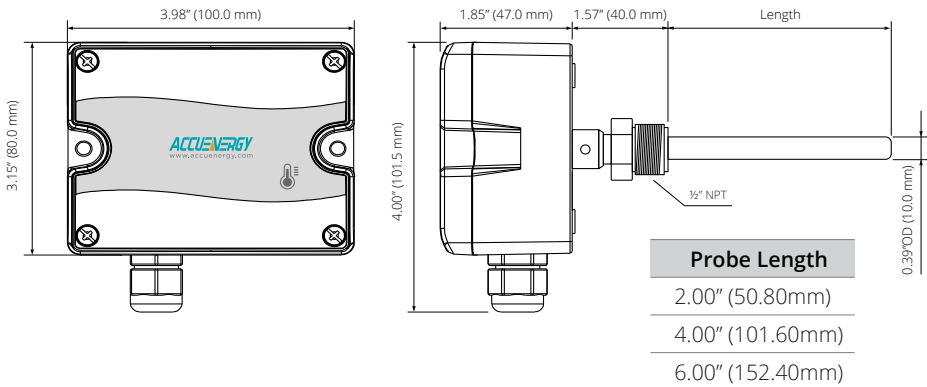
AcuTEMS IM Front, Side, and Thermowell Dimensions
